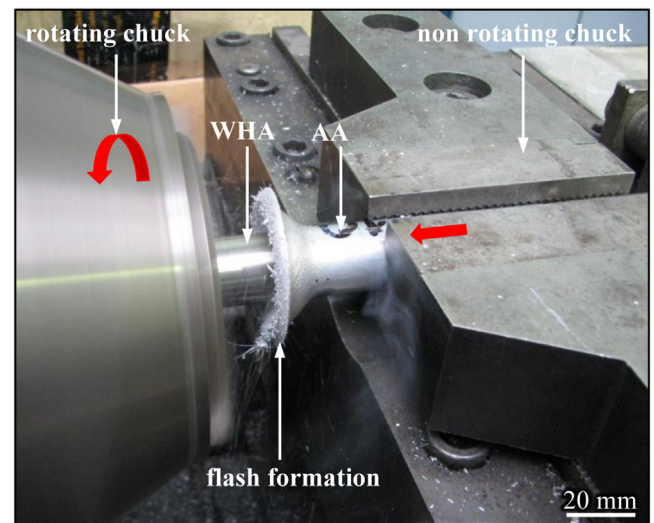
Experimental setup for continuous drive friction welding.
